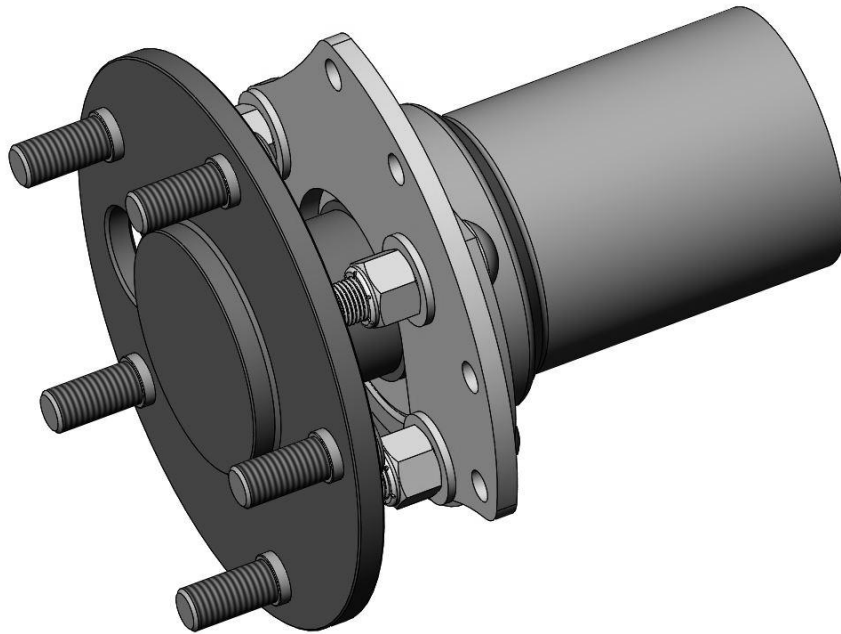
Axle Re-installed w/Primary Caliper Mounting Bracket
